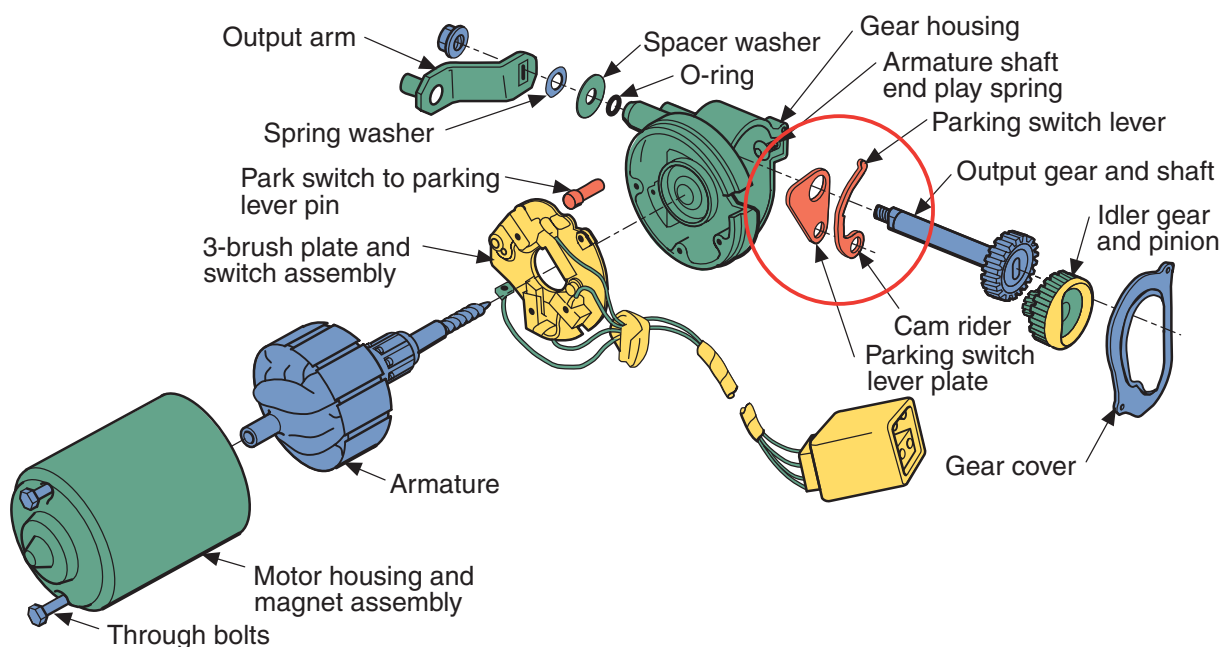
An exploded view of a wiper motor with a park mode.
